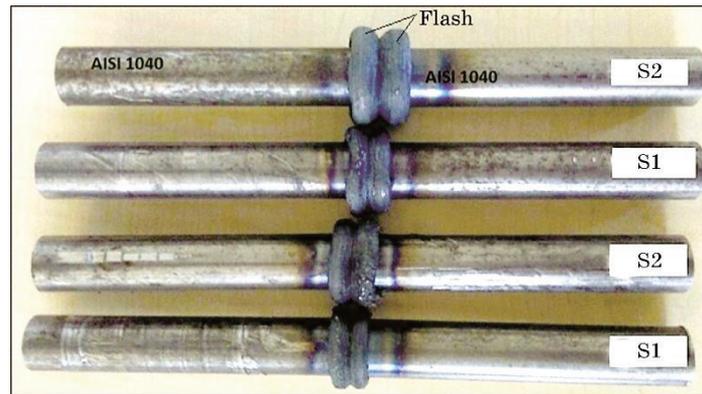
Macrophotographic view of friction welded samples.
